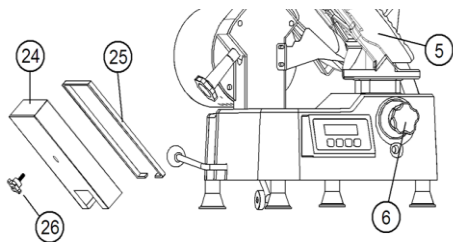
DISASSEMBLY THICKNESS GAUGE PLATE
